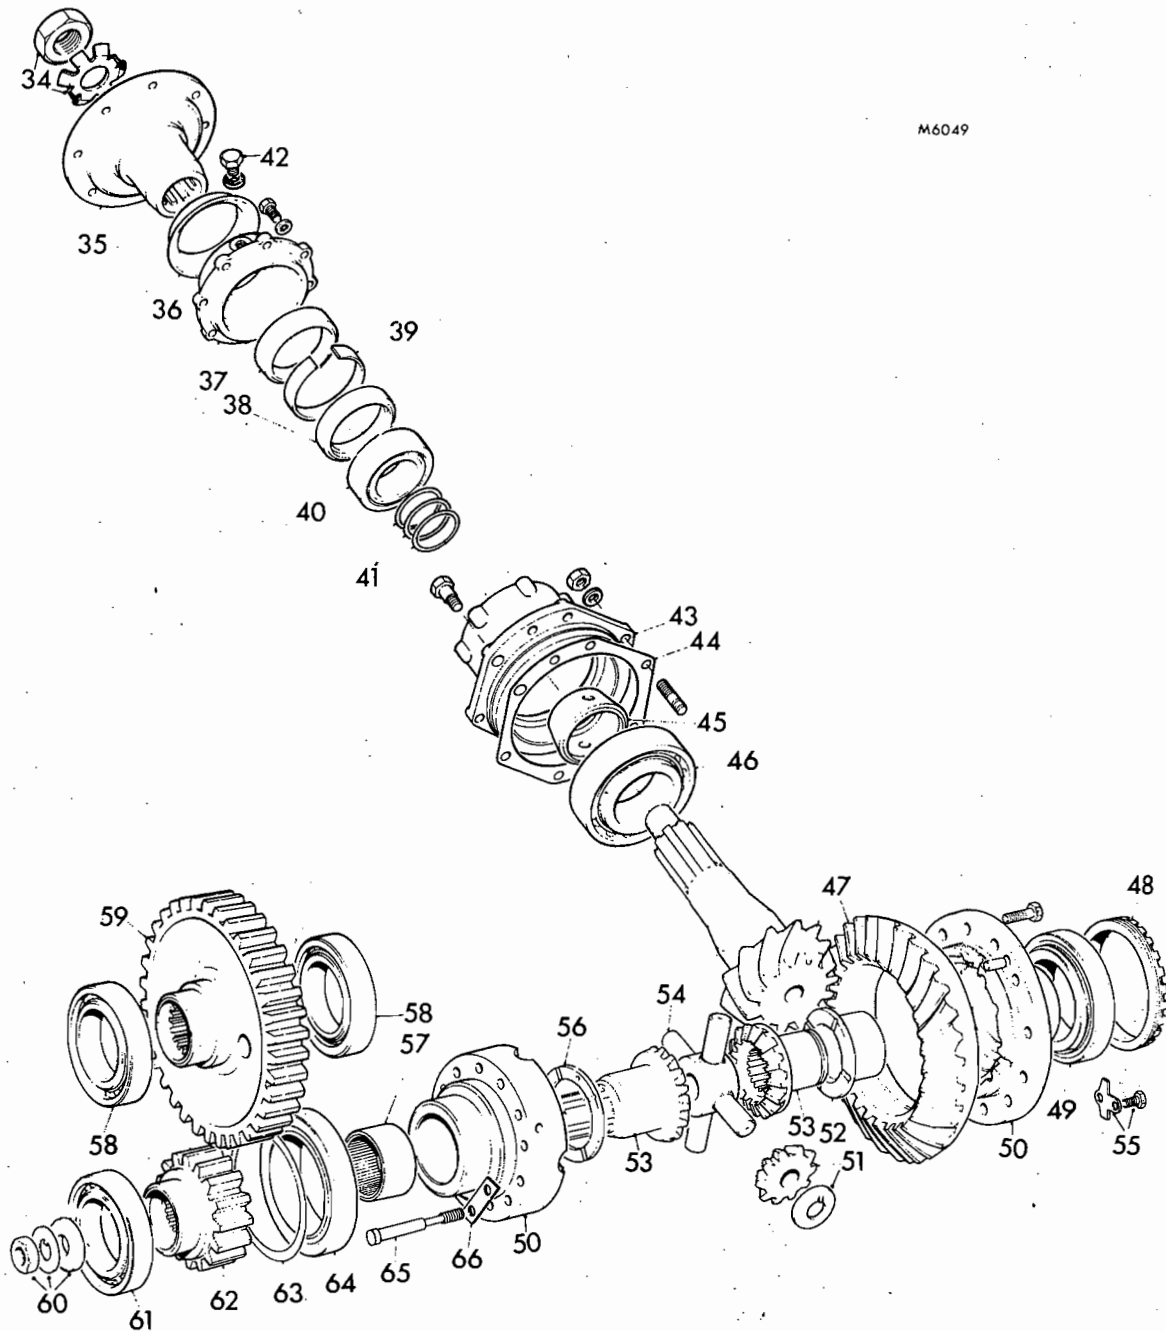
EXPLODED VIEW OF DRIVING HEAD AND OFFSIDE TRANSFER GEARS
